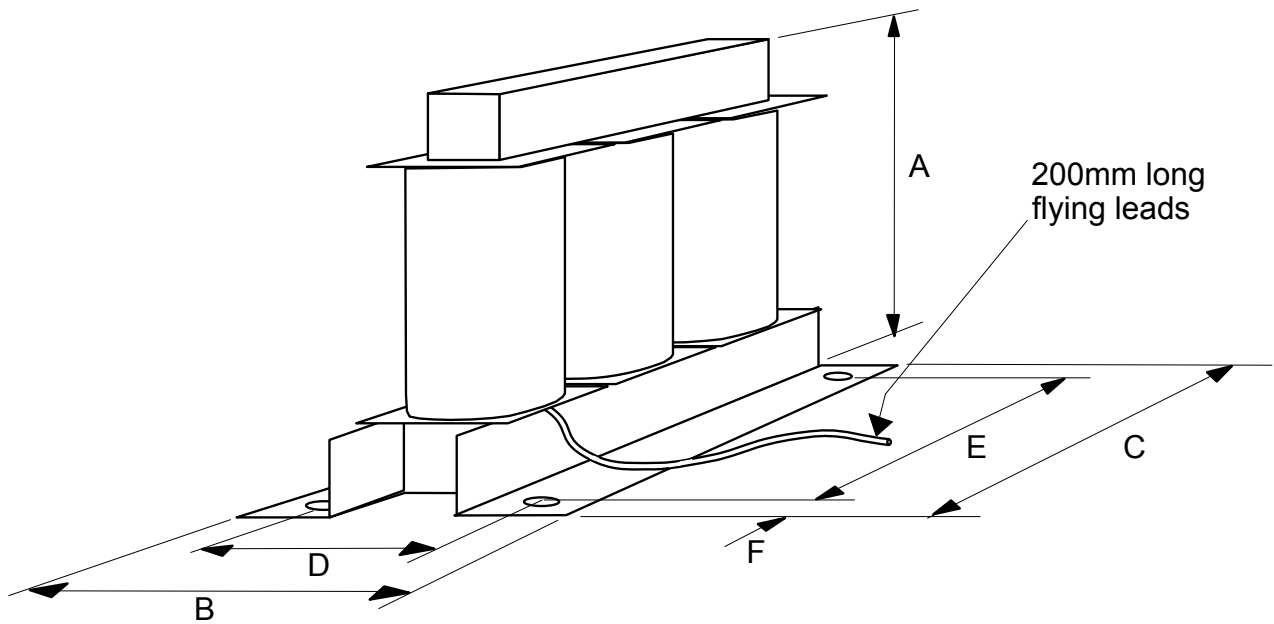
Filter Mounting Details, Part No. CO467843U340
